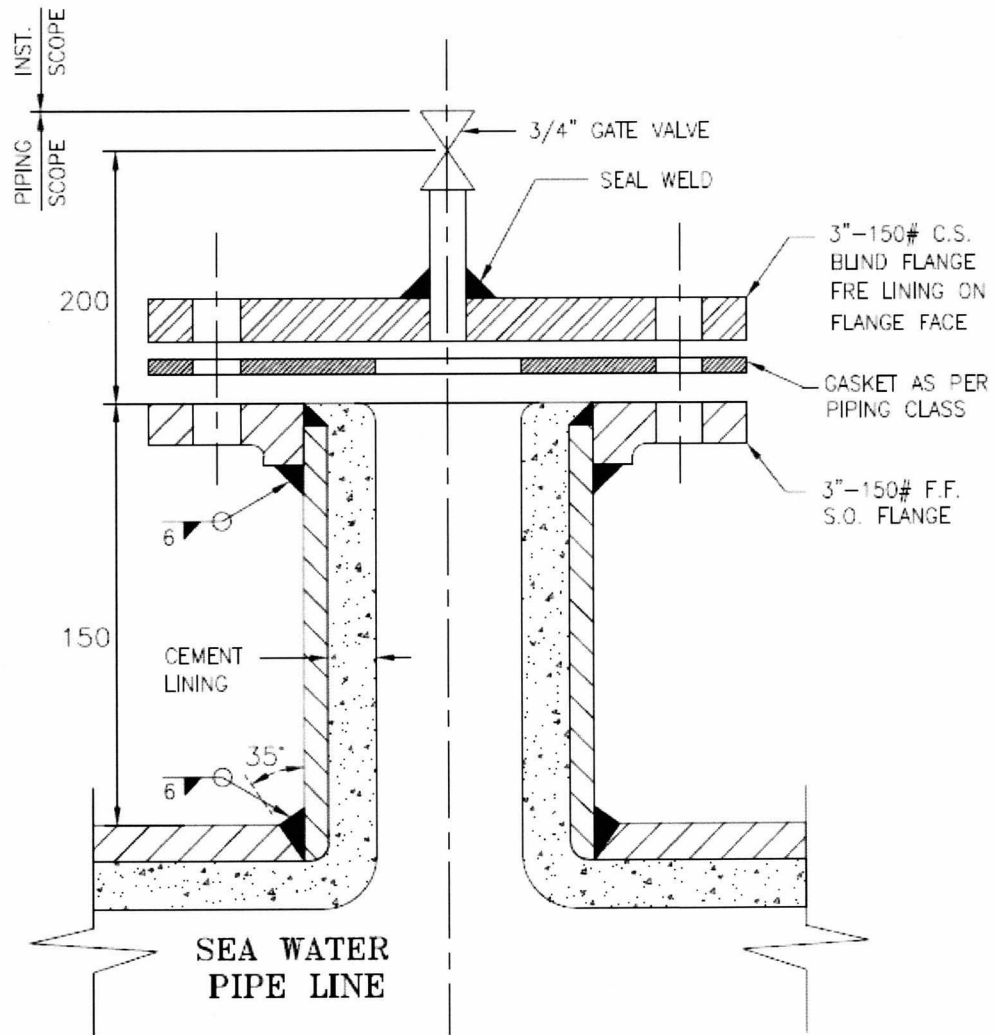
DETAIL OF INST. SCOPE ARE INDICATIVE ONLY AND SHALL BE AS PER INST. STD.
